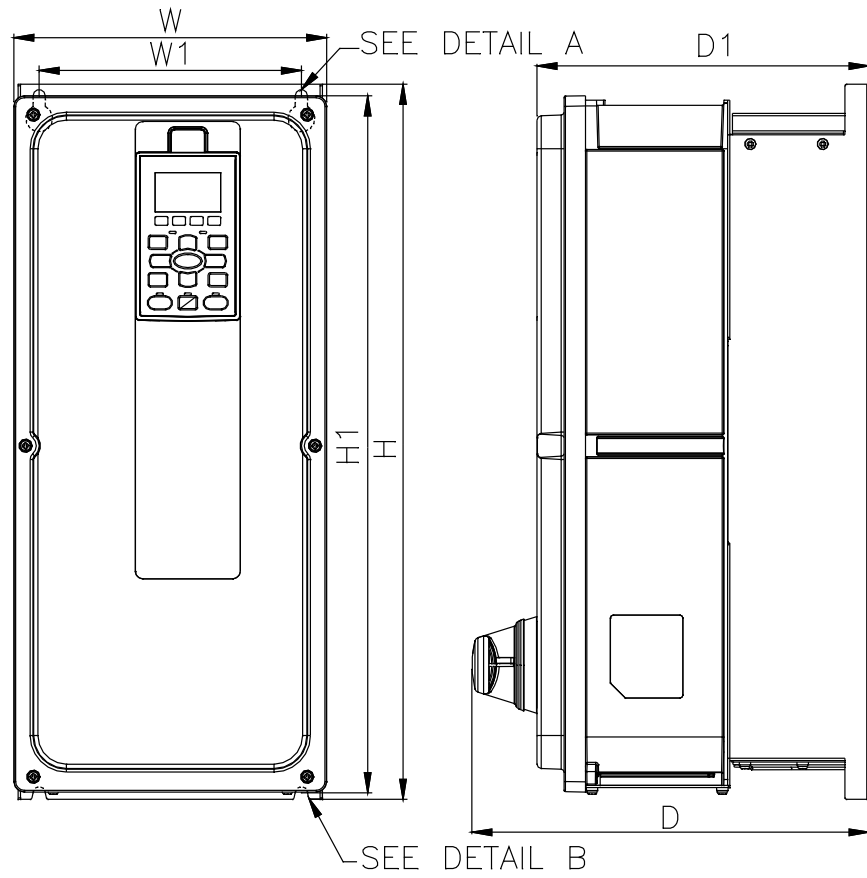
DETAIL A (MOUNTING HOLE) DETAIL B (MOUNTING HOLE)
